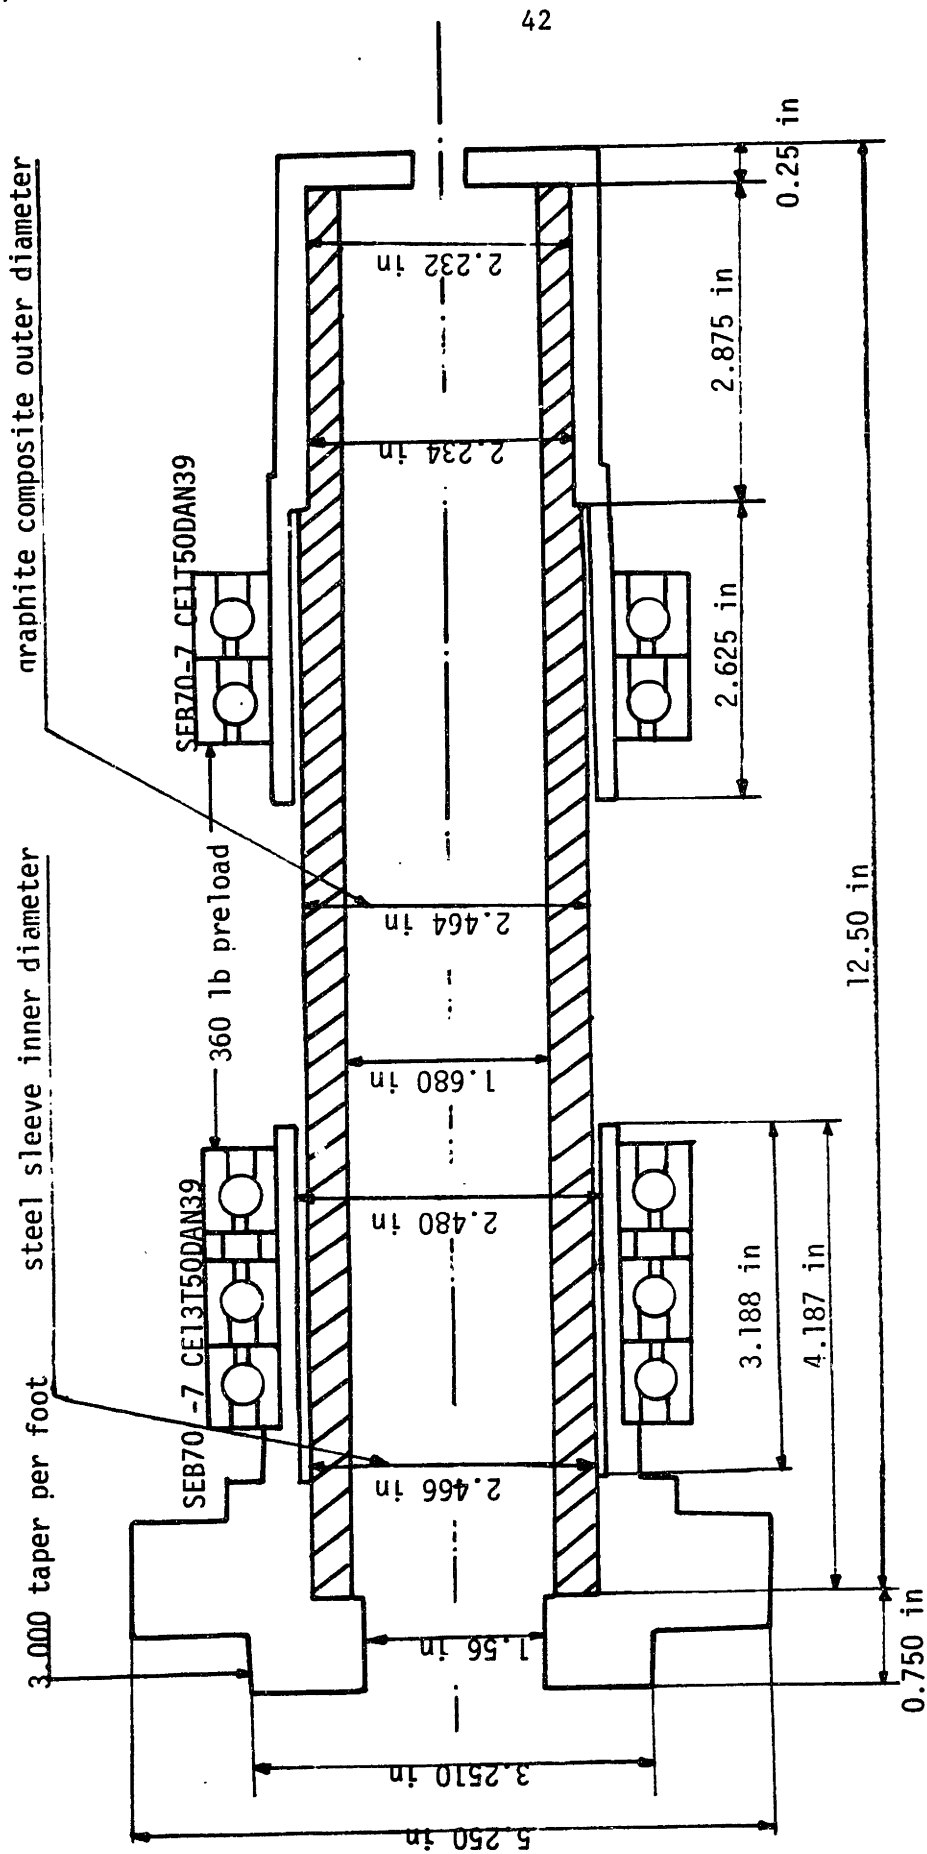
Some Dimensional Characteristics of the Graphite Epoxy Composite Spindle Bearing System
